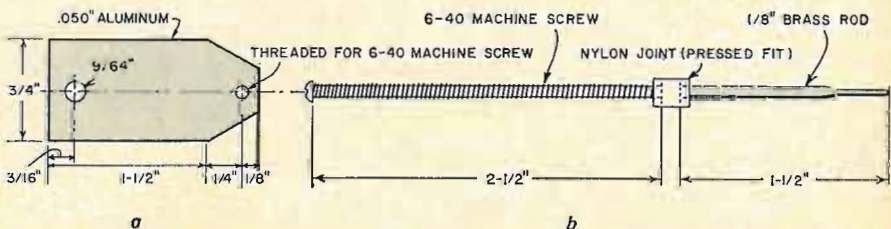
Modify the relay by making up an extension arm (a) to support trigger arm (b). Setup is used on spring-driven cameras set to shoot single-frame exposures.
